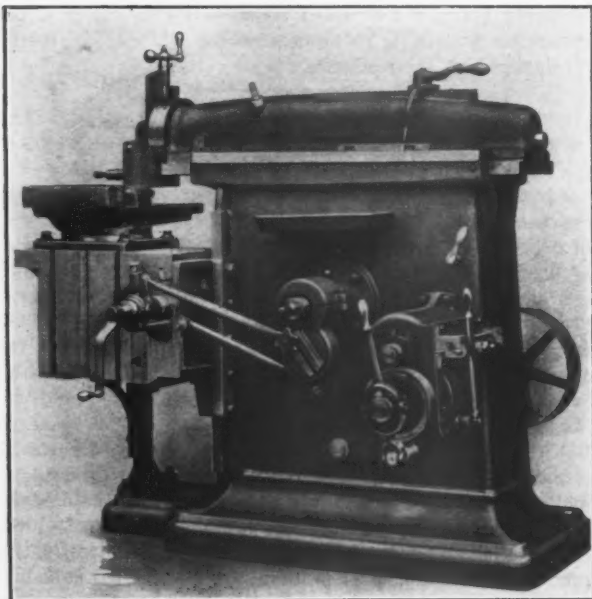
A 20-In. Back Geared Crank Shaper Built by the Queen City Machine Tool Company, Cincinnati, Ohio, and Equipped with the Improved Gear Box.
